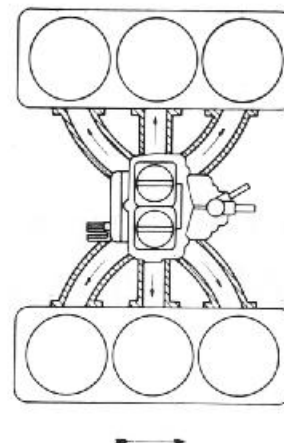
Single carburettor fitted to a six-cylinder V-engine (Sec 1)
